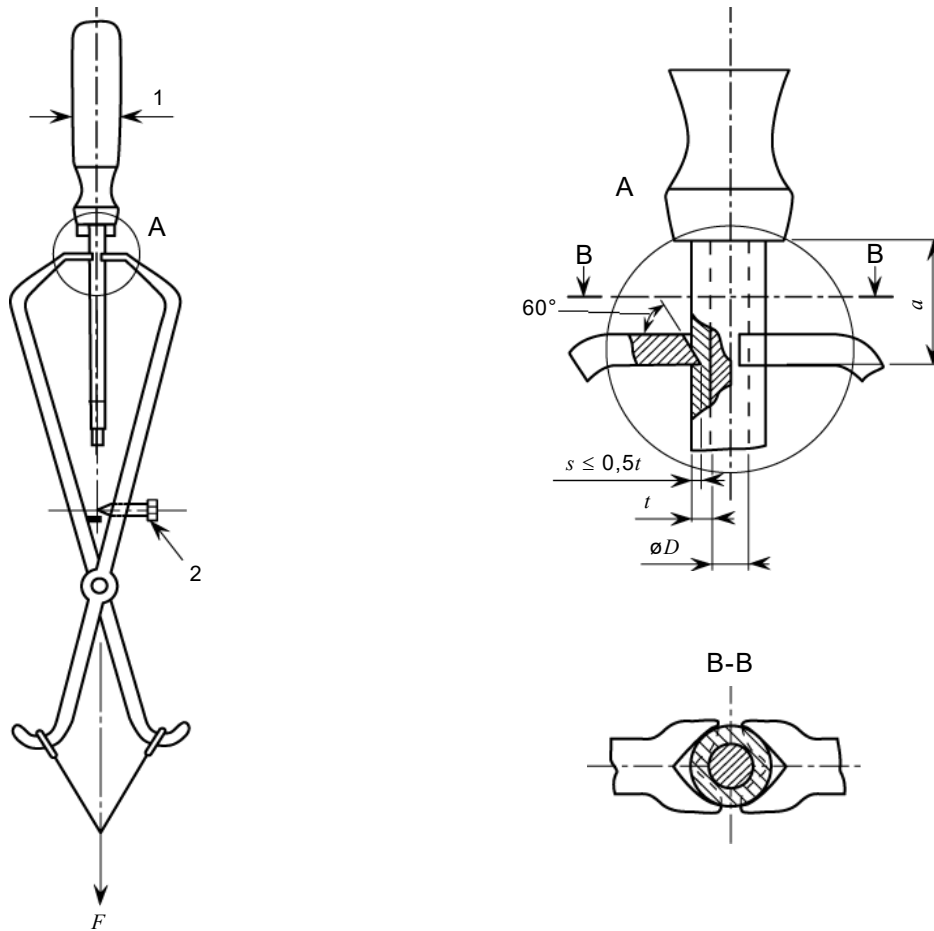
Principle of the testing device for checking adhesion of the insulating coating on conductive parts of the insulated hand tools – Test on the working head – Method B
